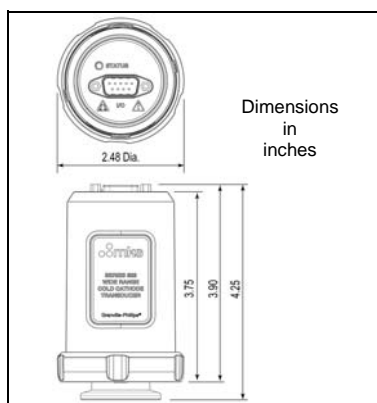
Dimensions of the Cold Cathode Gauge (with NW25KF Flange)
